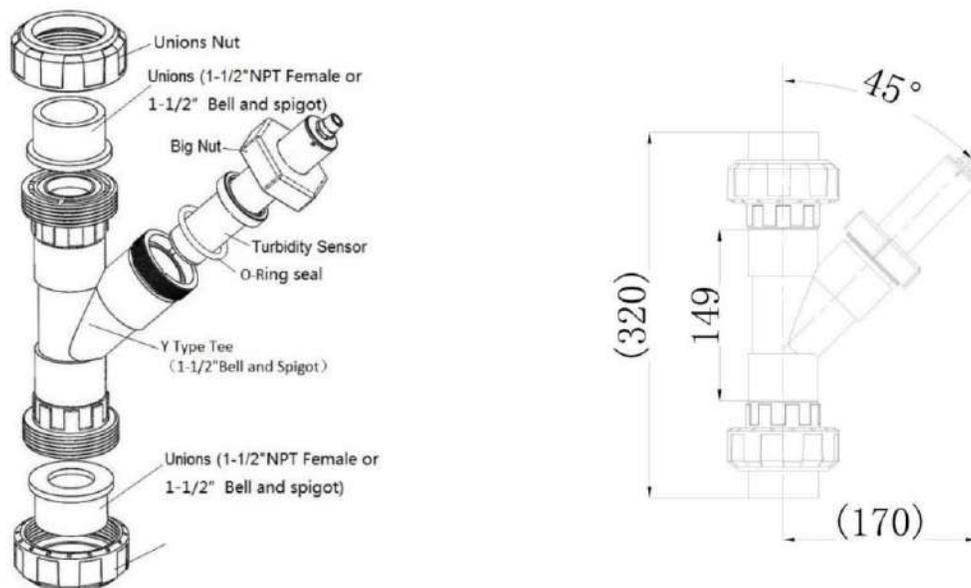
FT-100 In-Line Tee Assembly Dimensions (mm) & Diagram
